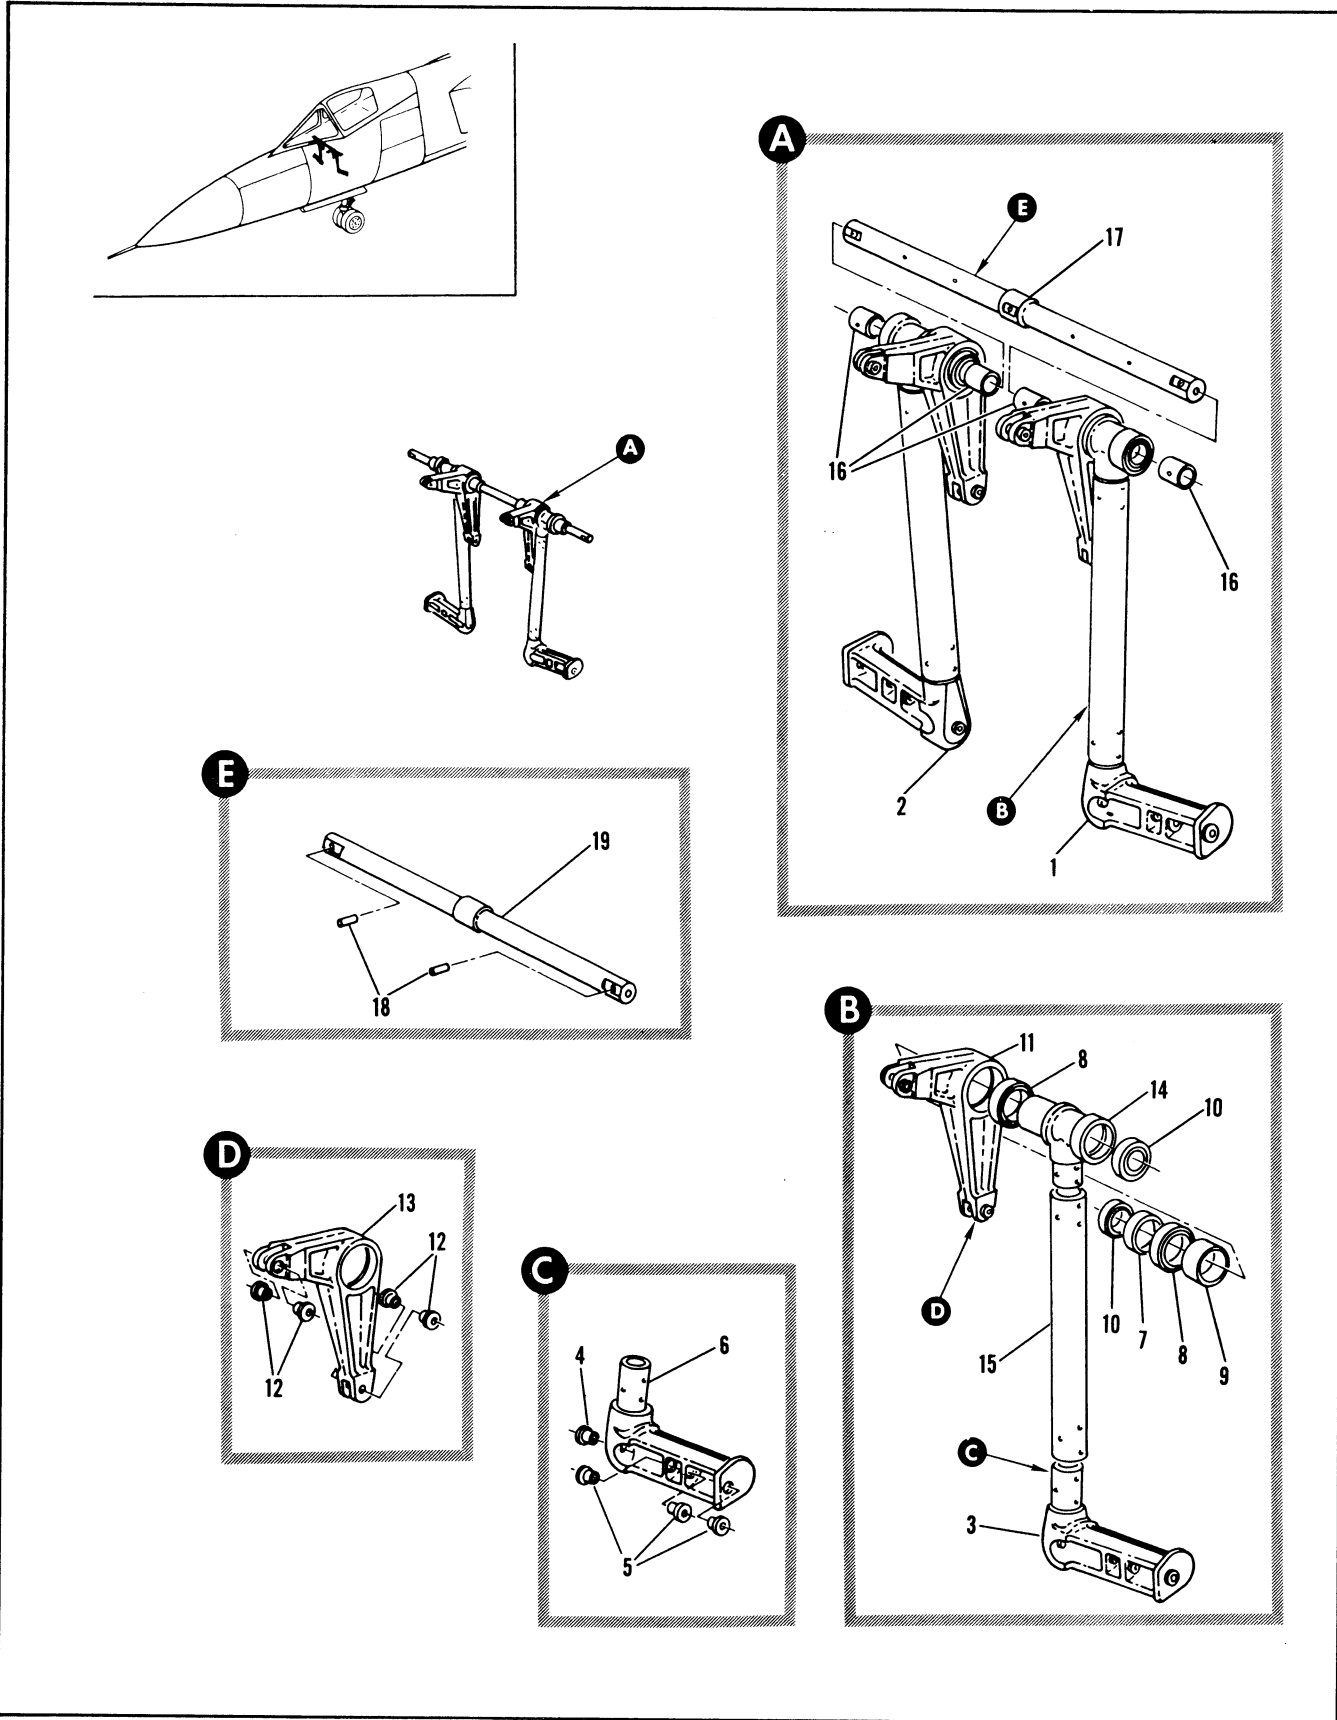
Rudder and Brake Pedal Hanger Tube Assembly
